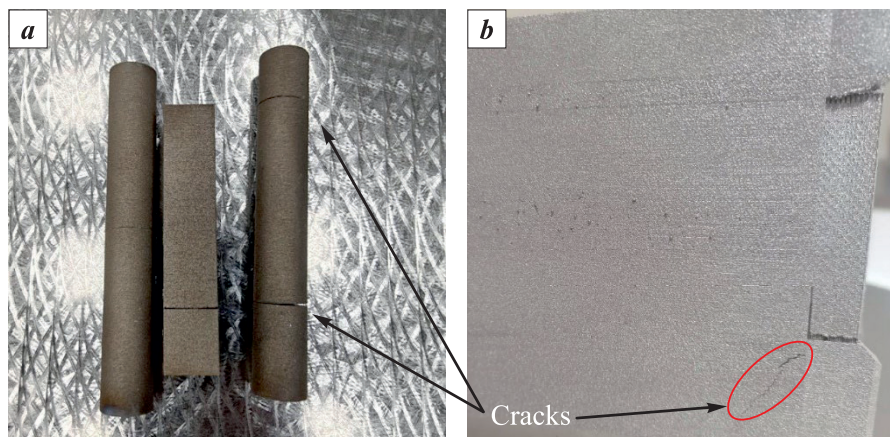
Appearance of surface defects in a VT6 witness samples (a) and in a VT20 workpiece (b)
